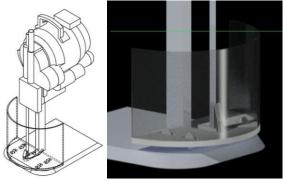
Illustration of the protective cover on the Straight knife fabric cutting machine
